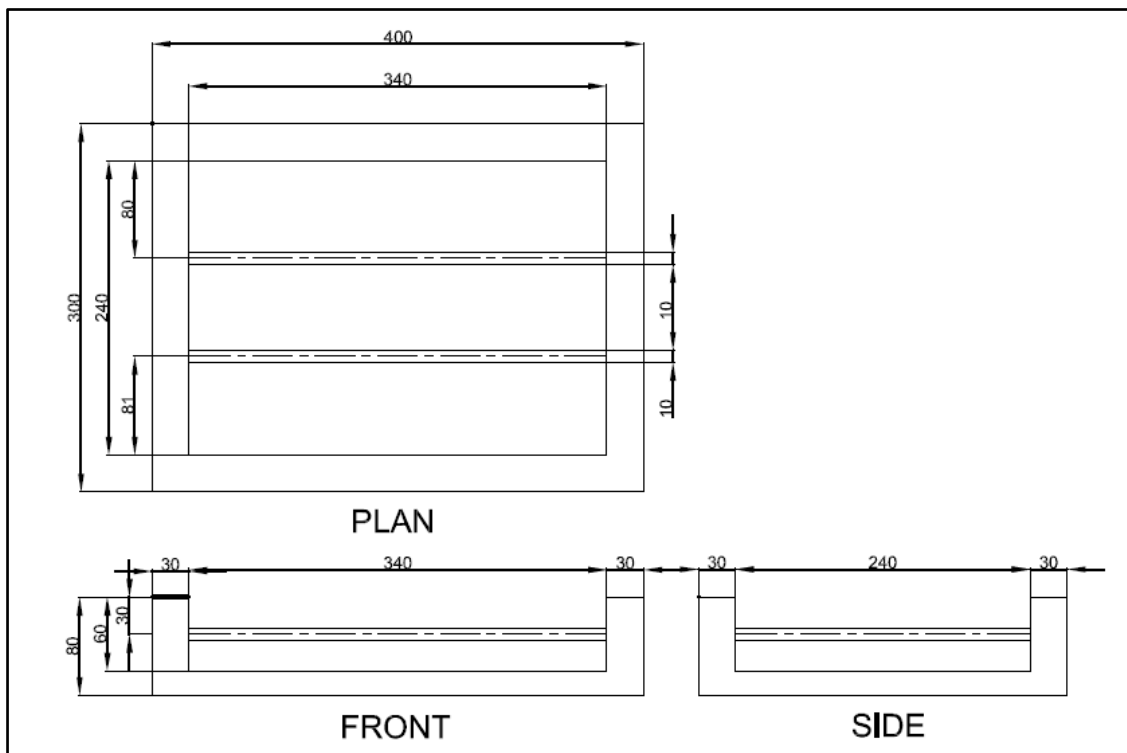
Dimensions (in mm) of the concrete mould developed
